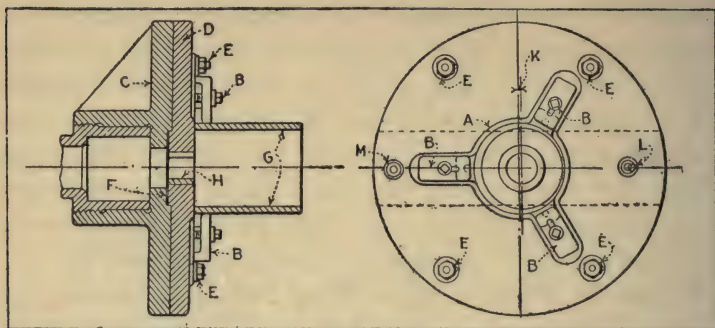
ECCENTRIC FIXTURE FOR A RING POT
